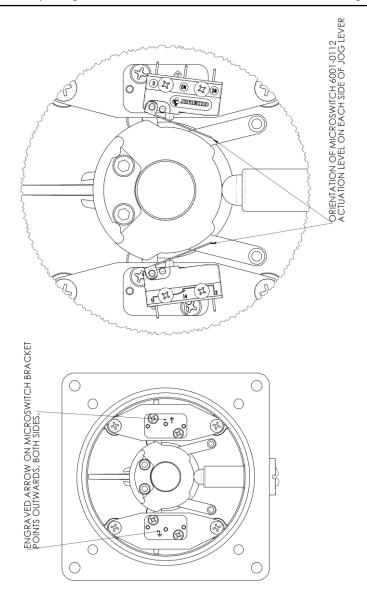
Placement of microswitch and mounting bracket inside jog lever housing
